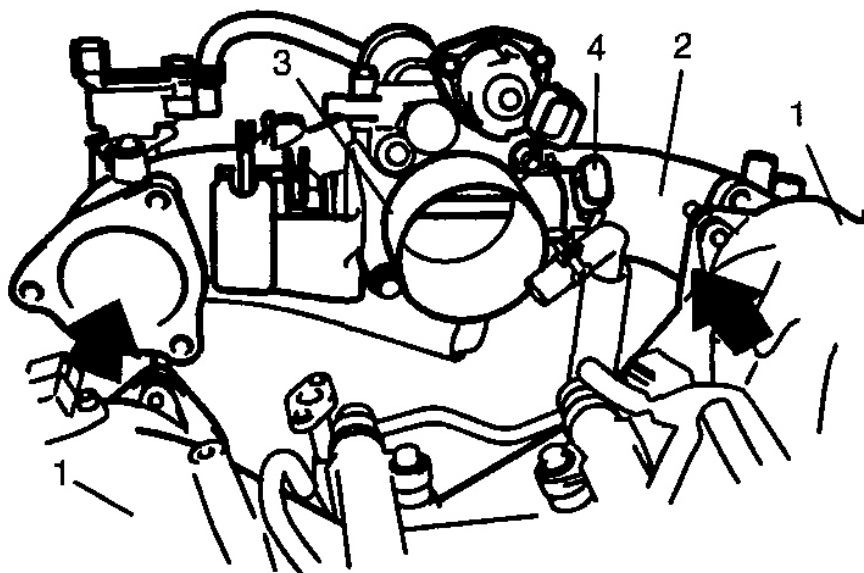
Detaching EGR Pipe From Exhaust Manifold
